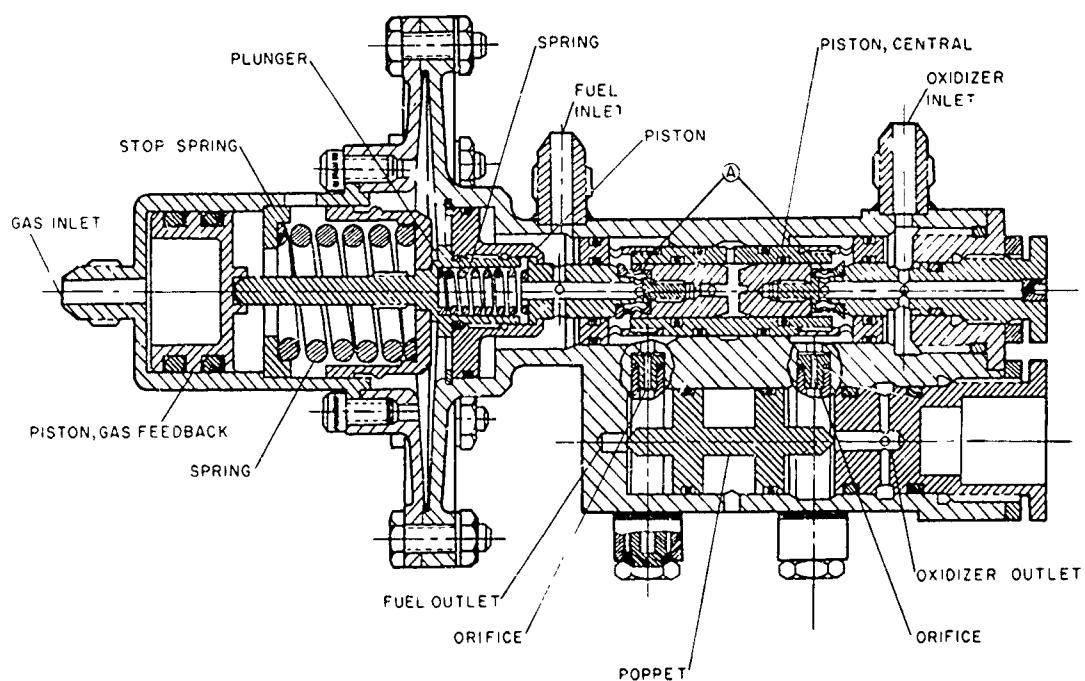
Hot Gas Controlled Bipropellant Injector-Valve Assembly.
